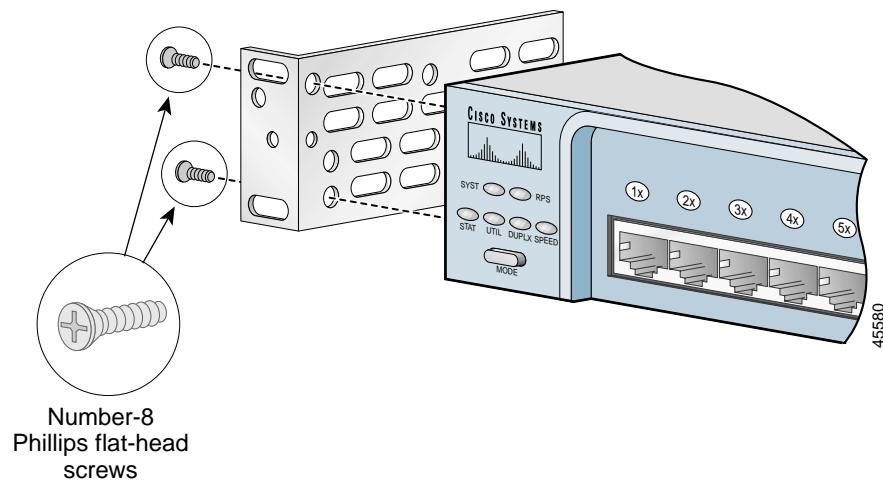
Attaching Brackets on the Switch in a 19-Inch Rack (Rear Panel Forward)
